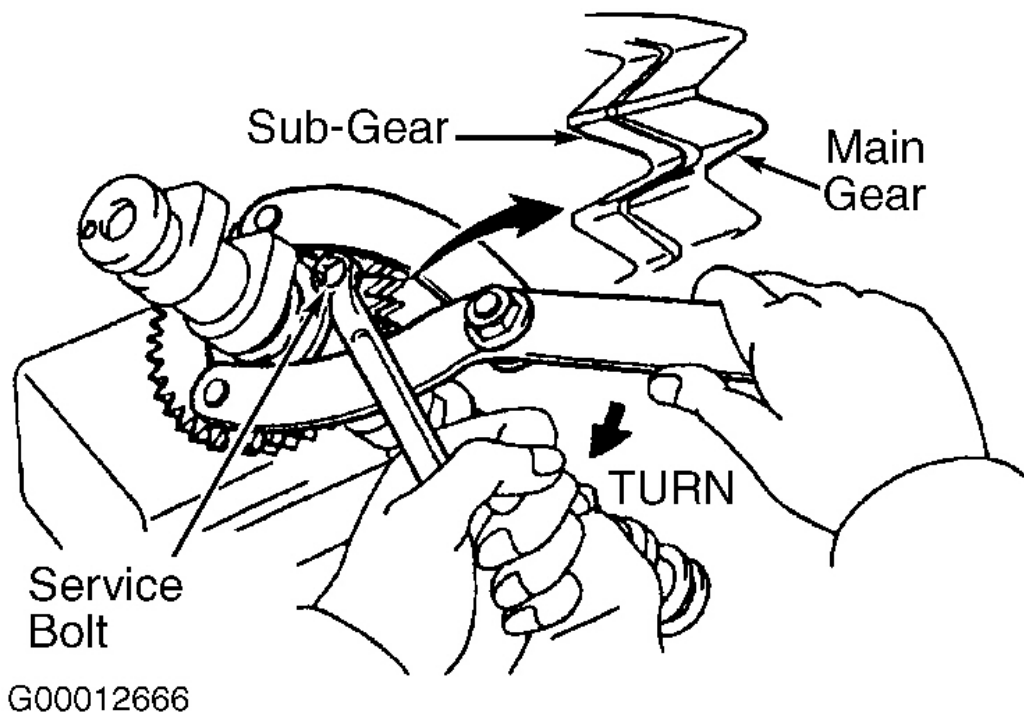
Removing Exhaust Camshaft Drive Gear & Sub-Gear
